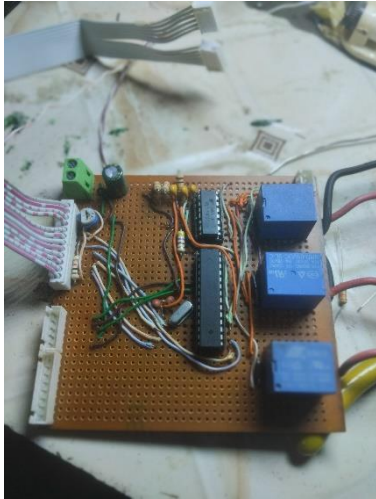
A VERO BOARD WITH SOLDERED COMPONENTS
